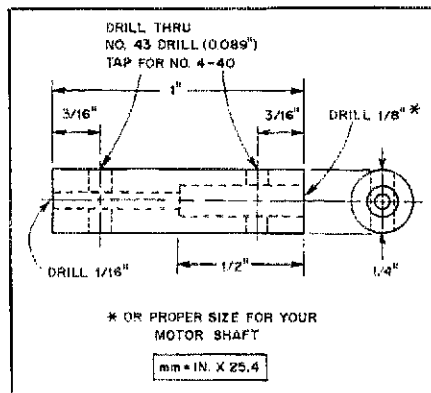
Construction details of a shaft coupler for use with the drill press. The diameter of the motor shaft hole may have to be adjusted to suit the motor you are using.
